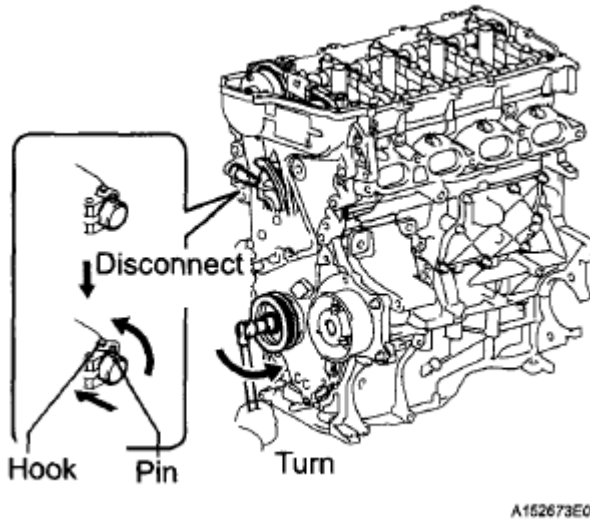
Turning Crankshaft Of Plunger Knock Pin
